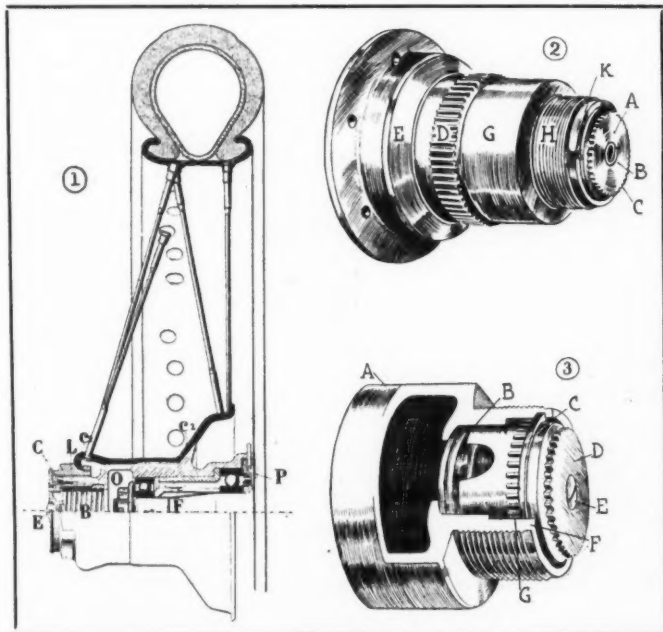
(1) R.A.F. demountable wire wheel on a front-wheel spindle—(2) auxiliary hub upon which pressed-steel wheel hub is mounted—(3) the barrel or plug serving, together with the screw cap, to secure the wheel
